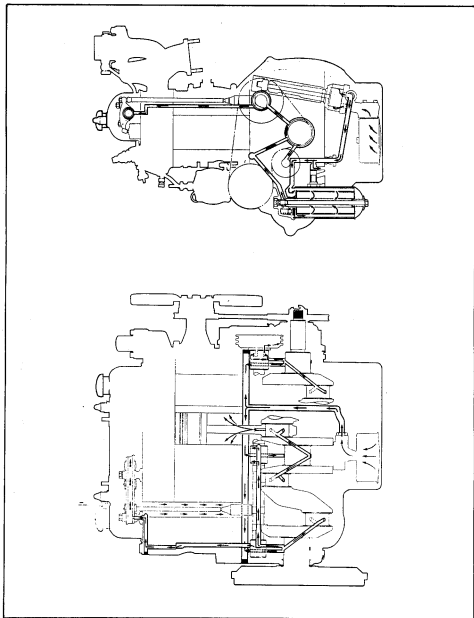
2.5 LITRE DIESEL ENGINE LUBRICATING SYSTEM
